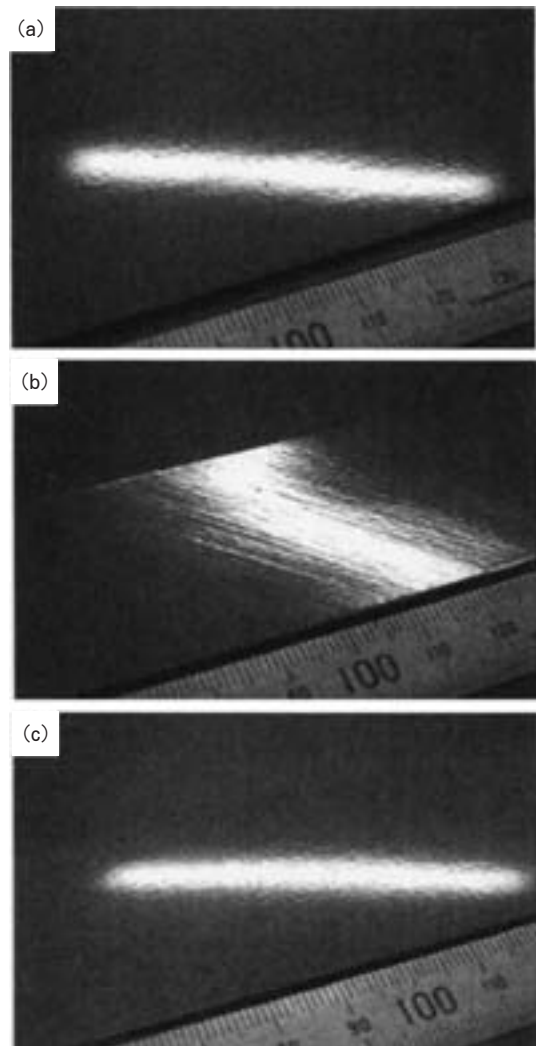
Surface appearance of 6016 alloy sheet showing ridging mark (roping) after tensile test. The tensile direction is (a) 0° , (b) 45° and (c) 90° to the rolling one⁵⁷⁾.
